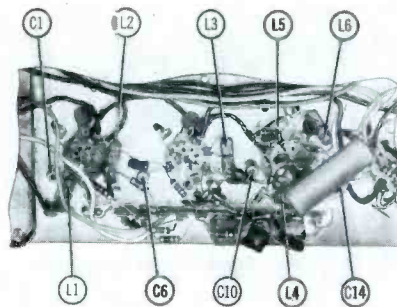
Underchassis View of Video IF Strip in Muntz Chassis 47A4.
